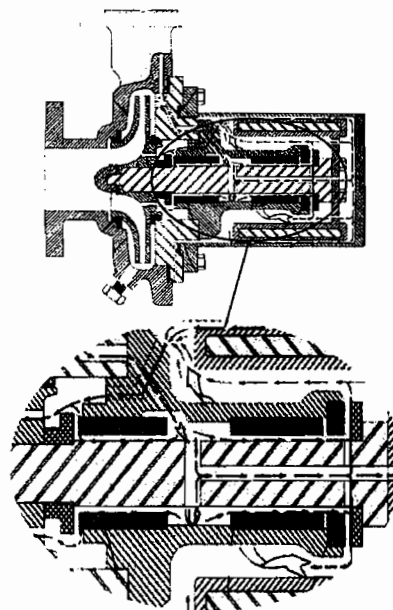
Magnetic Drive Pump Shaft Bearings with Lubrication Path Shown.
